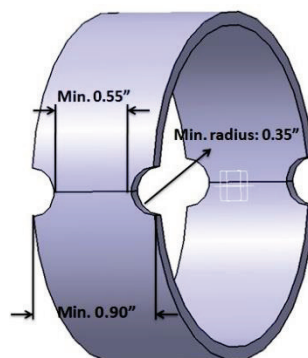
Dimensions of ring test specimens (Source: ASTM D2290-00 2003)
